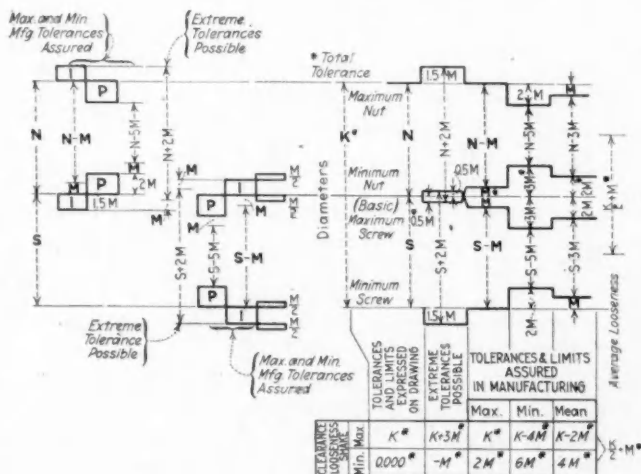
BRITISH PRACTICE IN THREAD GAGE TOLERANCES
